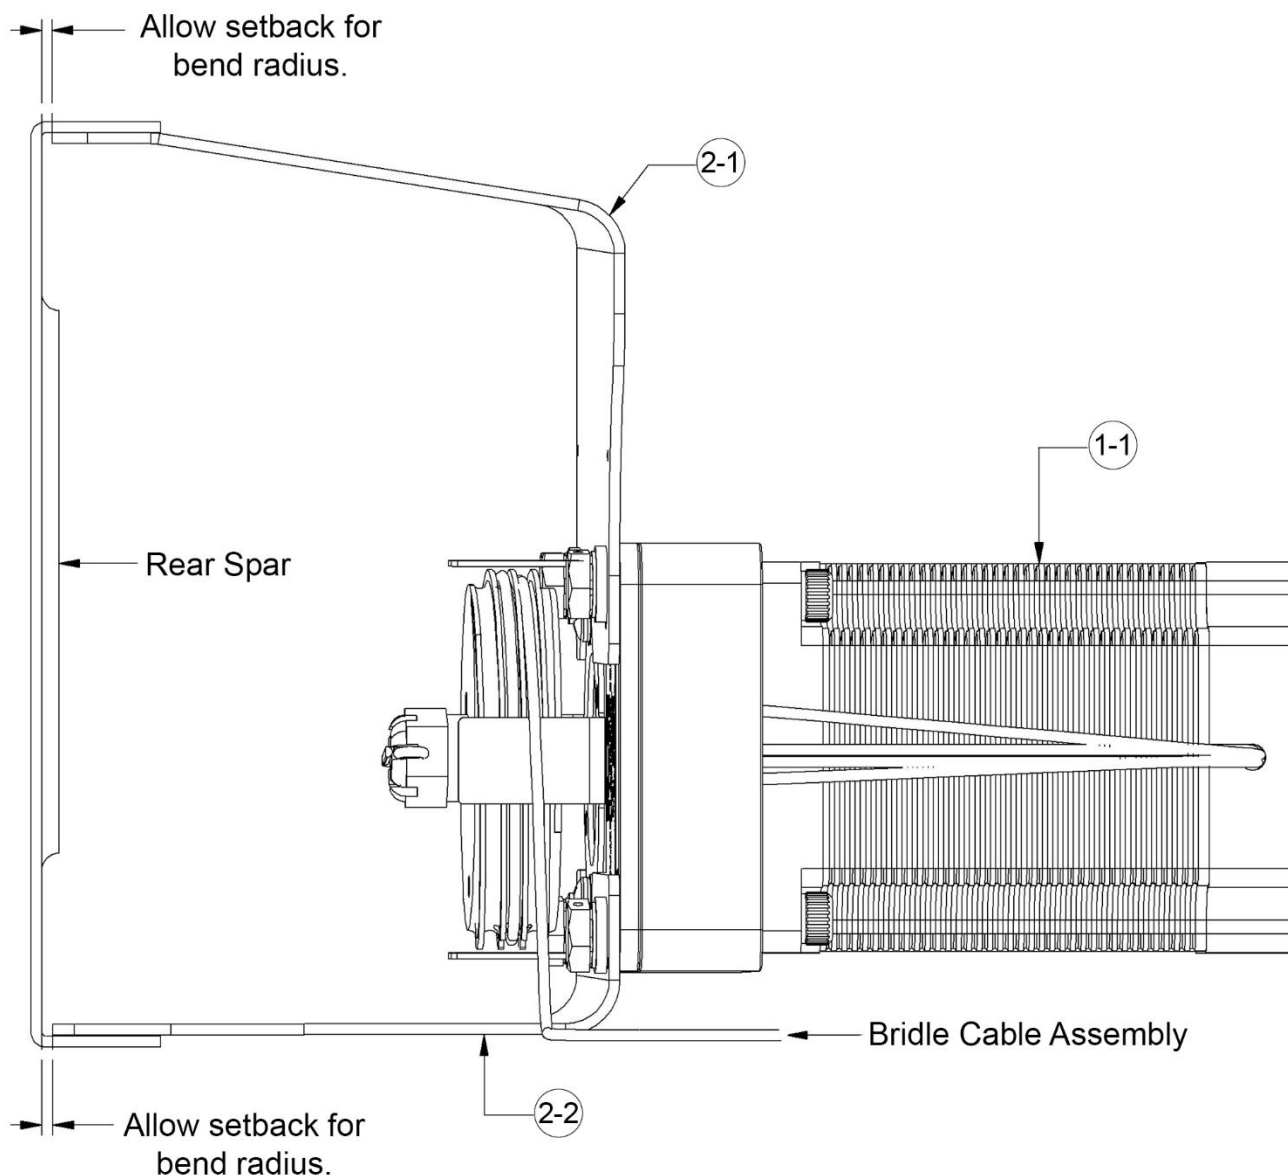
Allowing Setback for Bend Radii on Rear Spar Flanges
